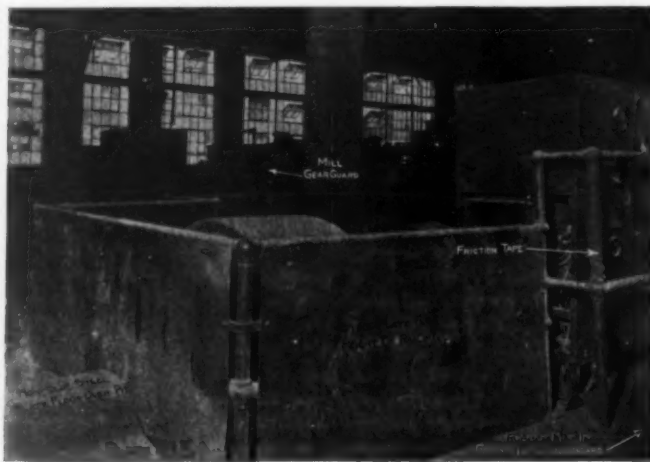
MILL PITS AND SWITCHBOARDS SHOULD BE SAFEGUARDED
